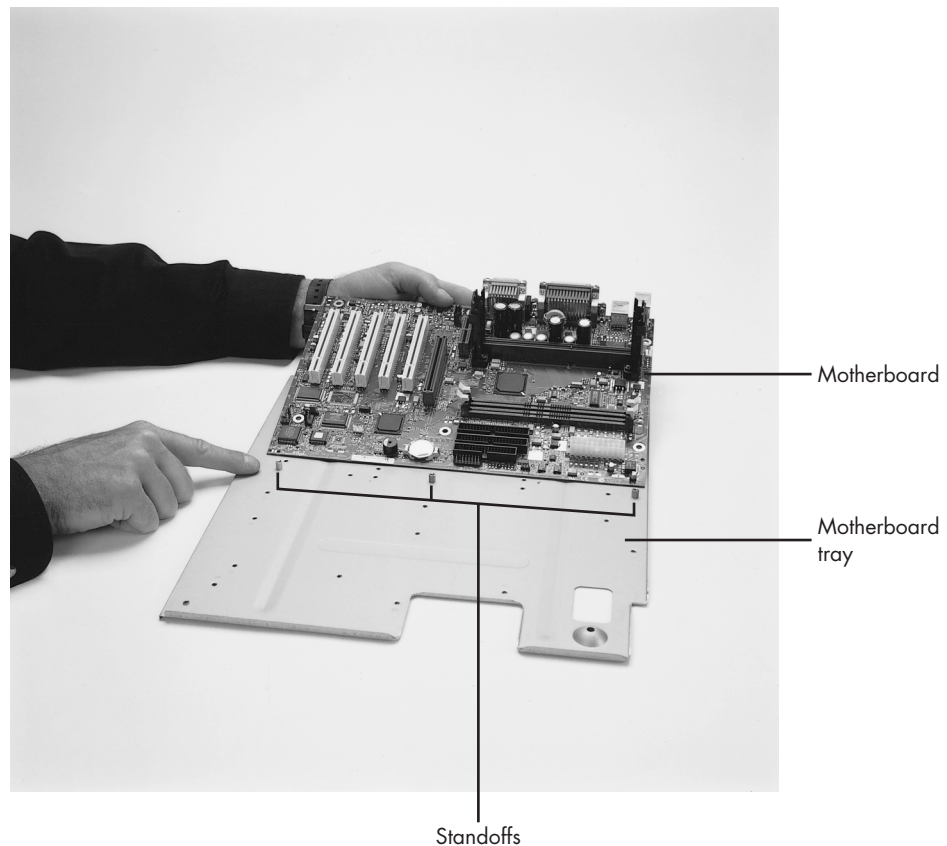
Make sure the standoffs align with the holes in the motherboard. *Motherboard courtesy of Intel Corporation.
